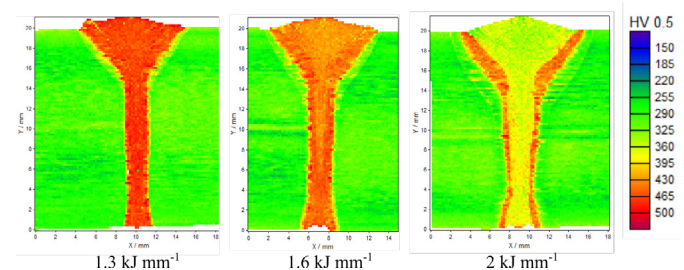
Hardness maps of the single-pass laser hybrid welded 20 mm thick S690QL plates with different heat inputs and contactless electromagnetic backing
